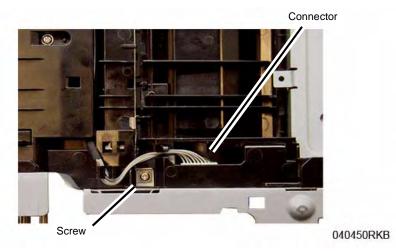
Drive Motor Connector & Ground Clip (Bottom View)
